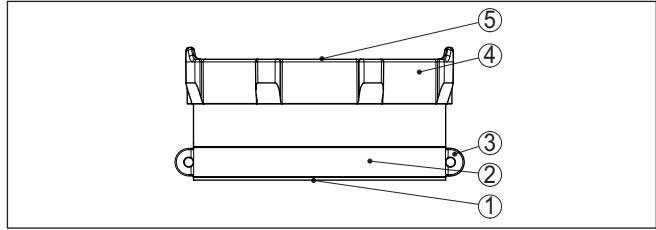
Components of the VEGAPULS Air 23 sensor (example version for adhesive joint)
